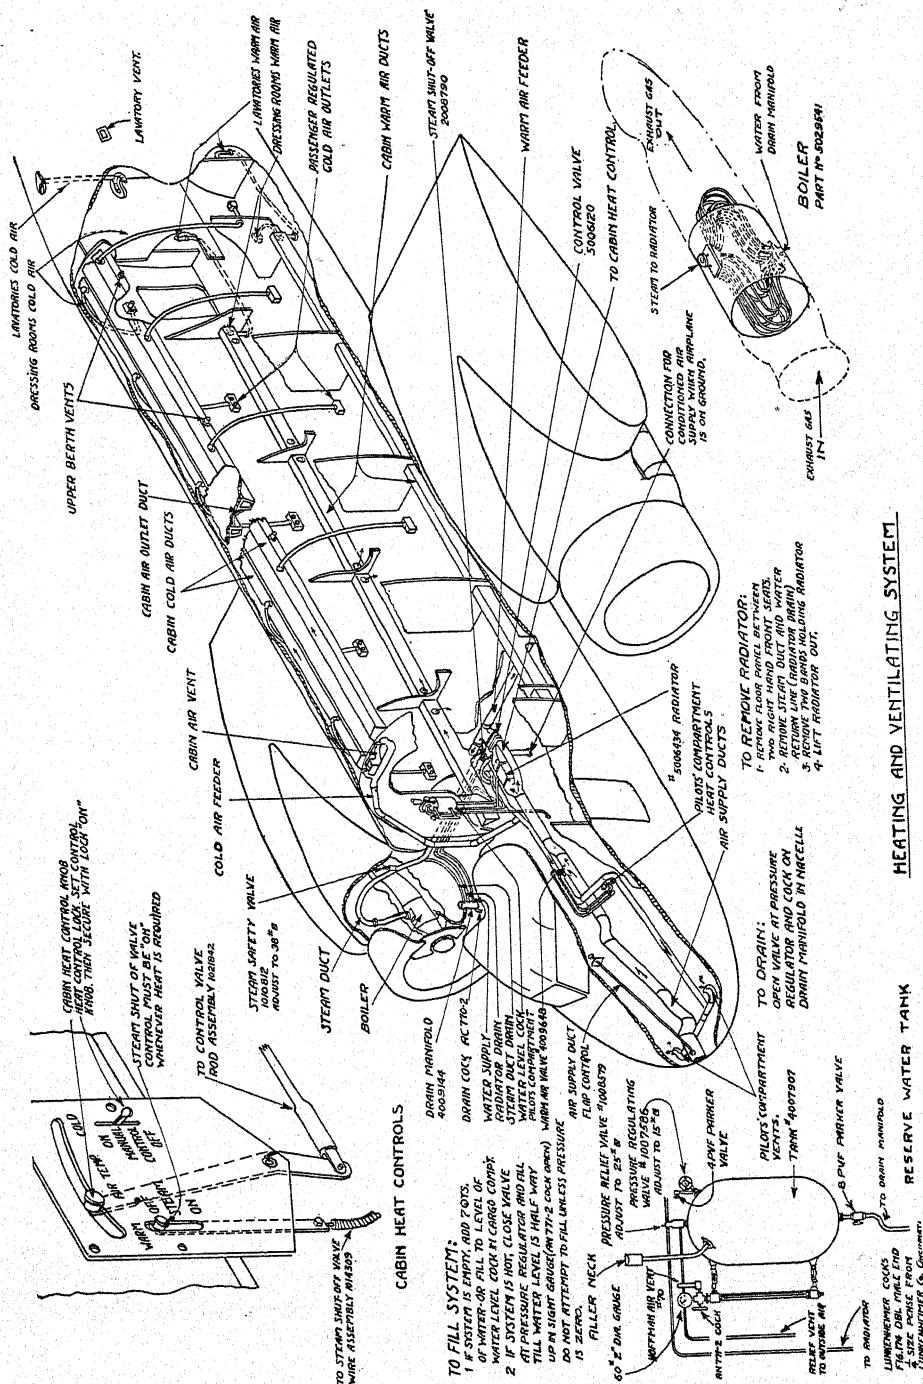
Perspective drawing of airplane showing heating and ventilating system.
